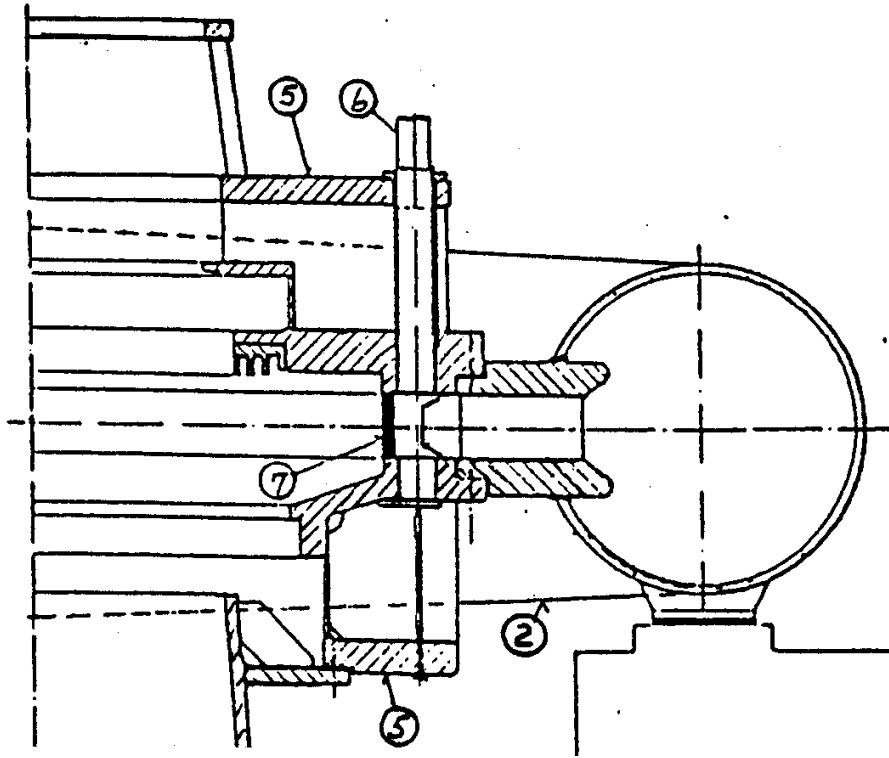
b Francis turbine parts erected for concreting (5 heads and bottom cover, 6 guidevane, 7 pressure-testing cylinder)
